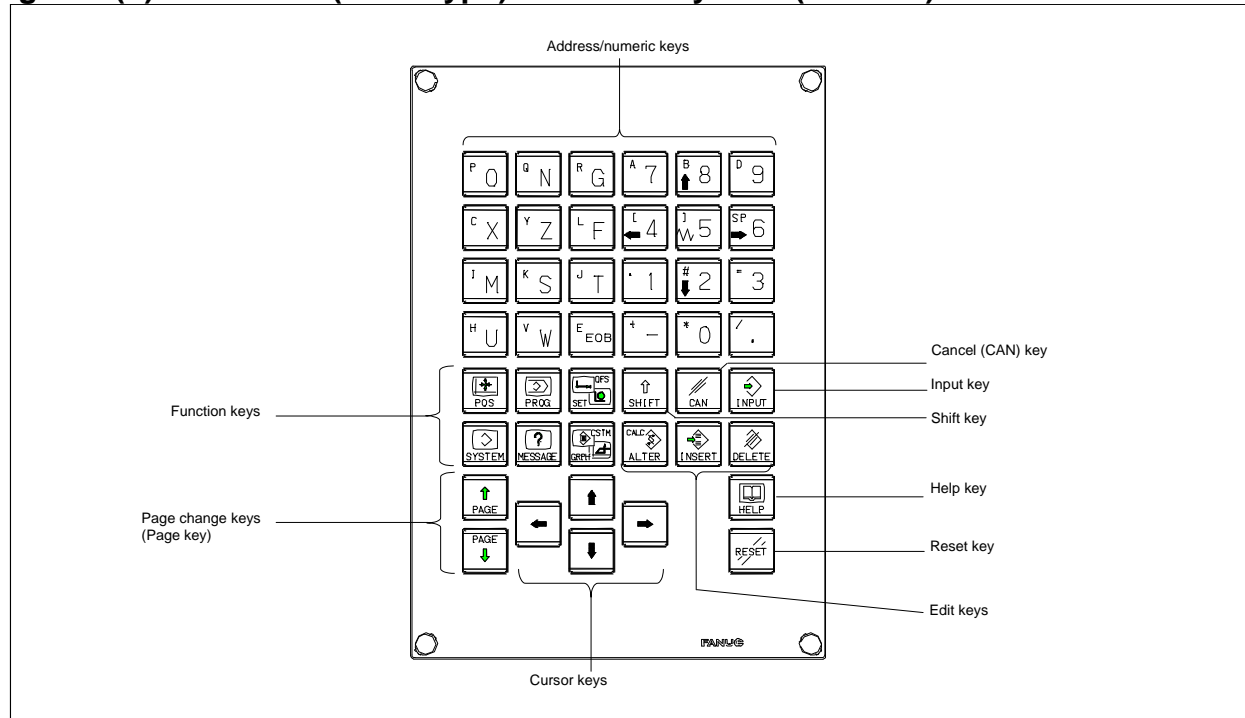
(c) MDI unit (ONG) with machining center system (M series)
